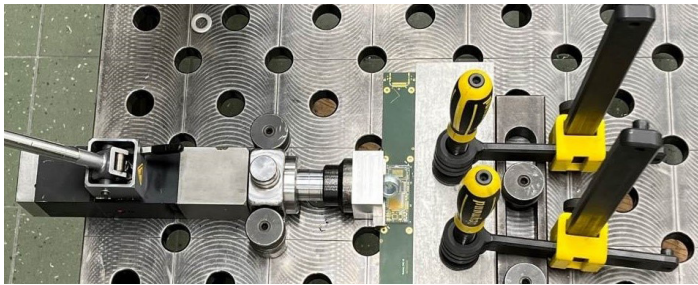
A dedicated hydraulic jig for tearing assembly from Fig. 4
